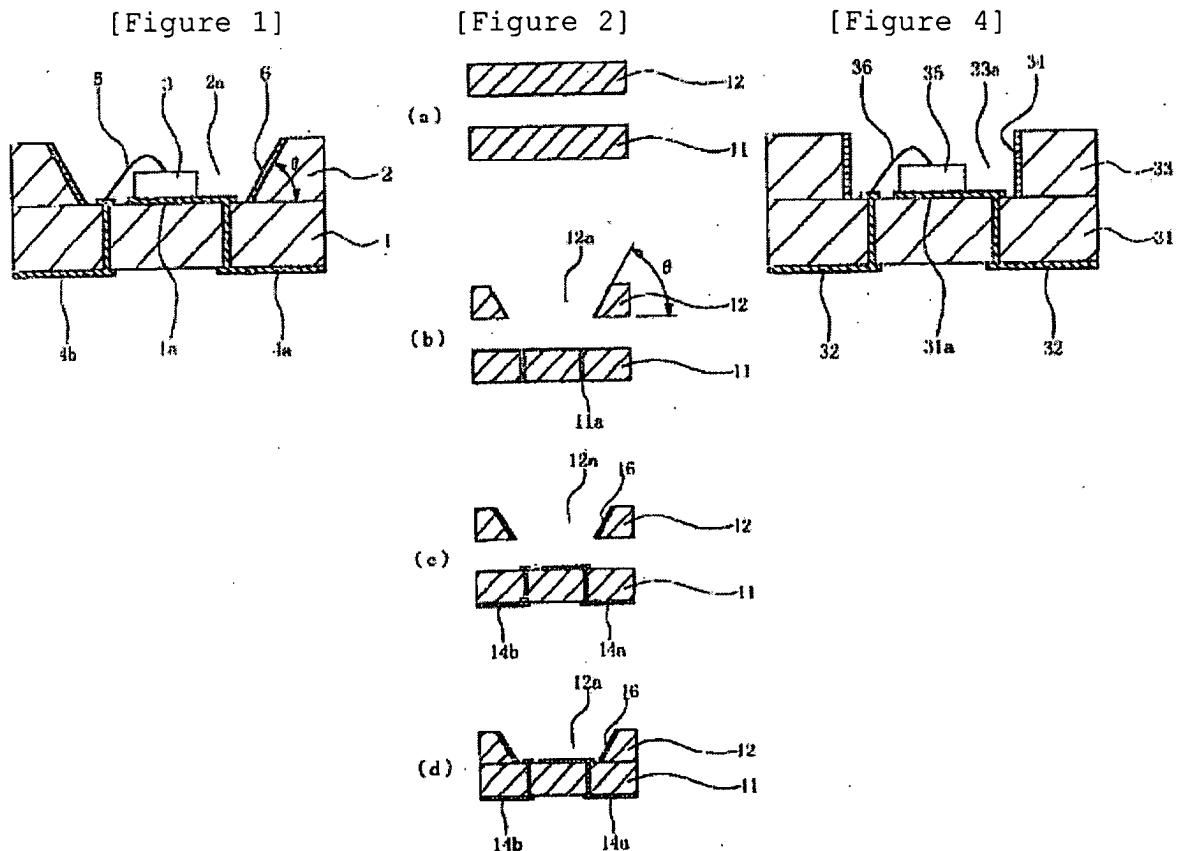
A sectional view of the conventional package used to contain the light-emitting element.
